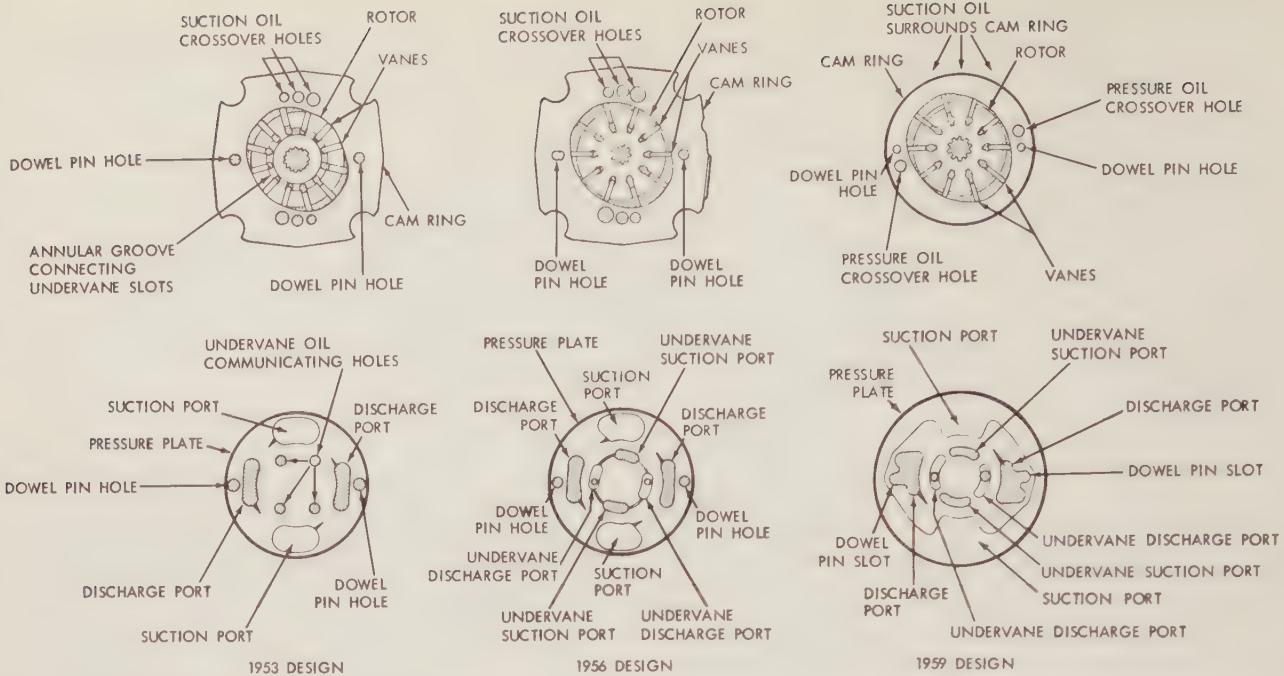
The vane type, double acting pump has been the basic design of powering steering pumps built by Saginaw Steering Gear Division as shown in this comparison (from left to right) of three pumps. In all cases the pumping means consists of (a) a cam ring that has two rise and two fall areas resulting in a hydraulically balanced system, (b) a rotor with vane slots, (c) vanes slidably mounted in the rotor slots, and (d) porting means in a pressure plate. The vanes are held in intimate contact with the cam ring by centrifugal force and hydraulic pressure applied to their undersides. The upper drawings are plan views of the rotor, vanes, and cam ring assembly. The lower drawings show the matching pressure plate for each design. Assembly views of the complete pumps using these designs are shown in Figs. 2, 4, and 6.
